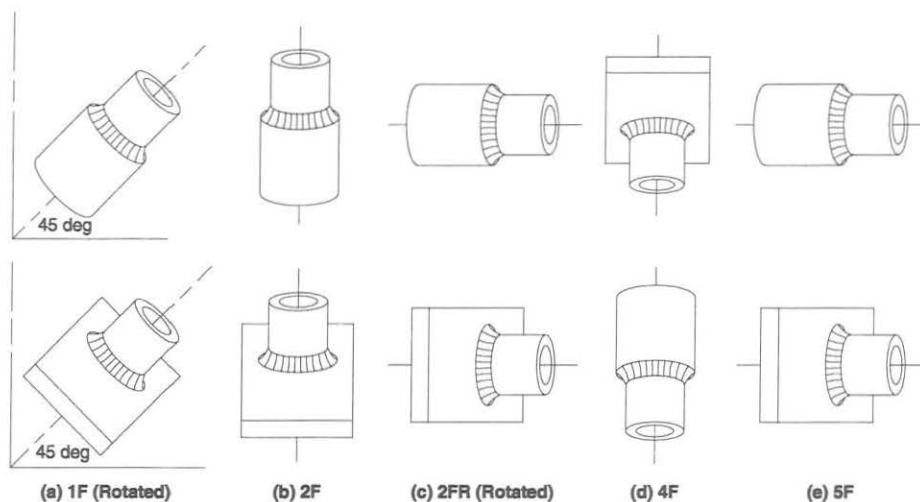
QW-461.6 fillet welds in pipe—test positions
